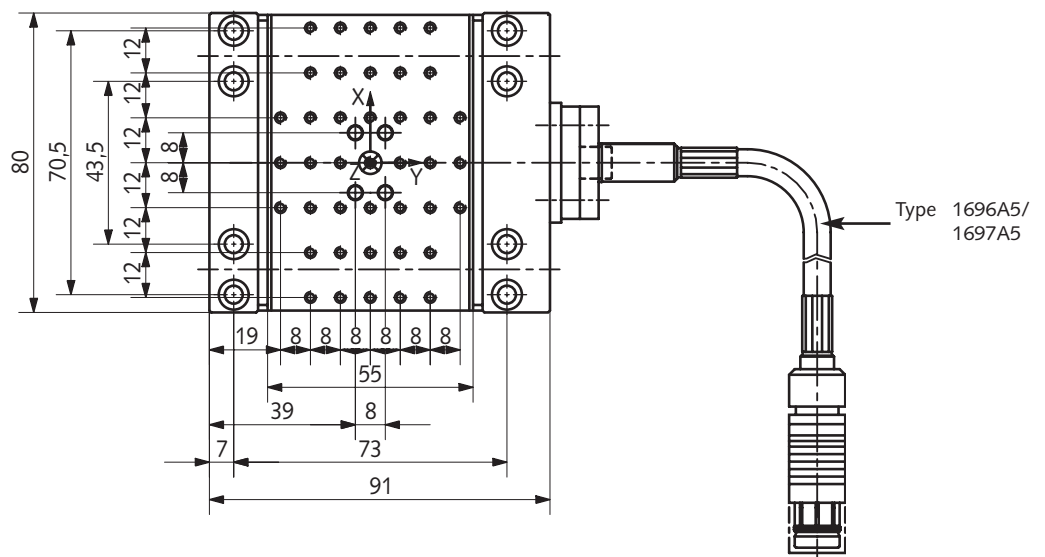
MiniDyn Type 9256C2 with large mounting plate
